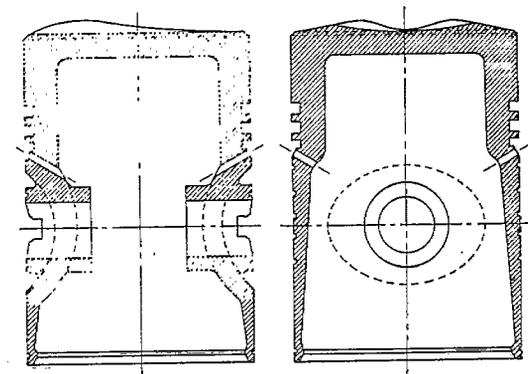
Sectional views of piston 12 magnesium alloy)
